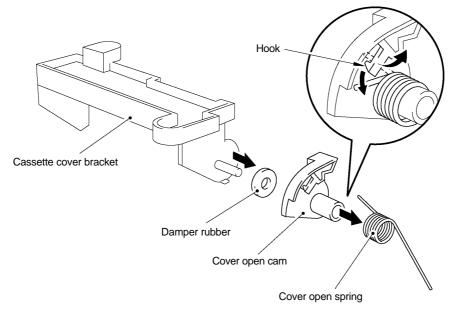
Removing the Damper Rubber and the Cover Open Spring
